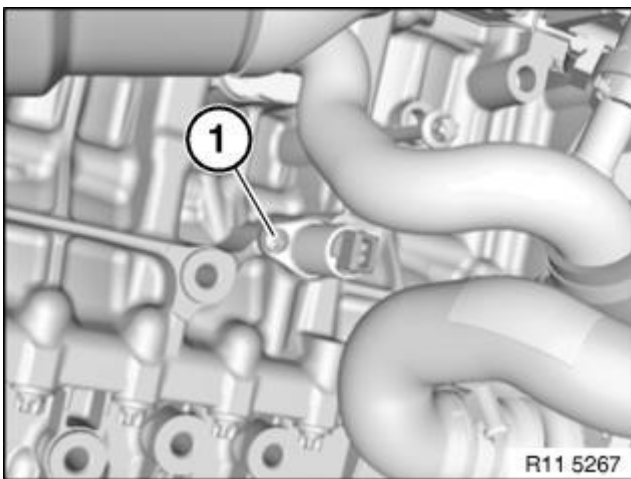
Release Screw (1) And Remove Hydraulic Valve (2)
